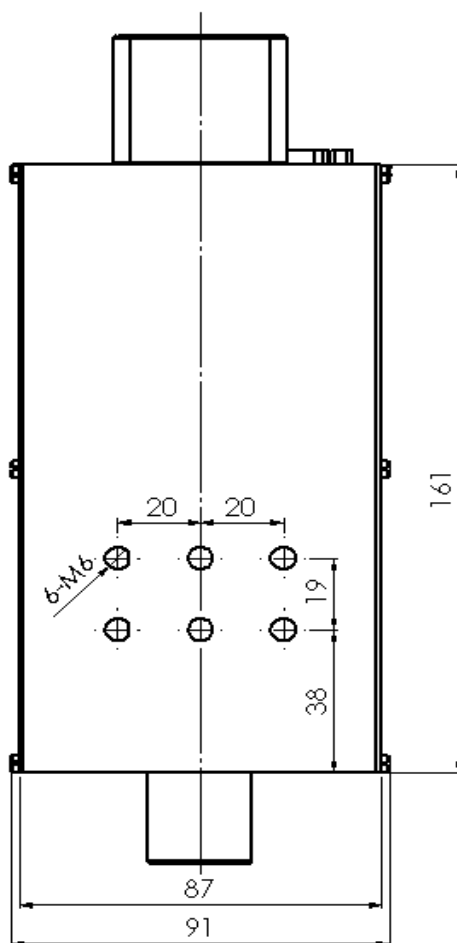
Positions of Installation Screw Holes at Back of Controller
